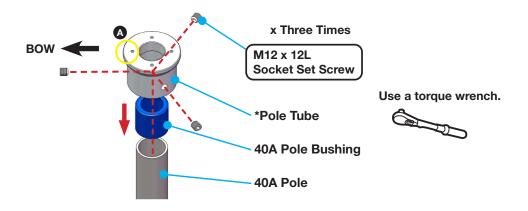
Installing 40A Pole Bushing inside Pole Tube
